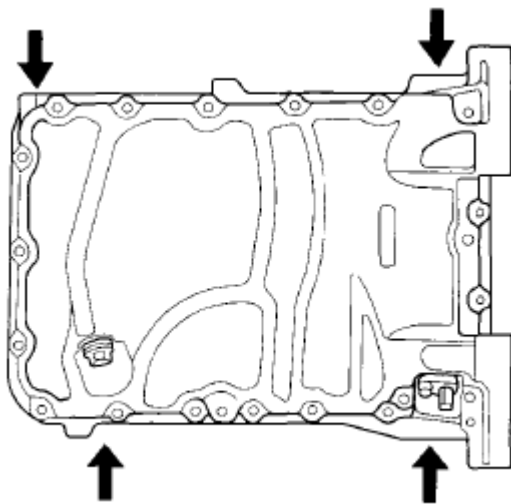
Identifying Oil Pan & Screwdriver Pry Points
